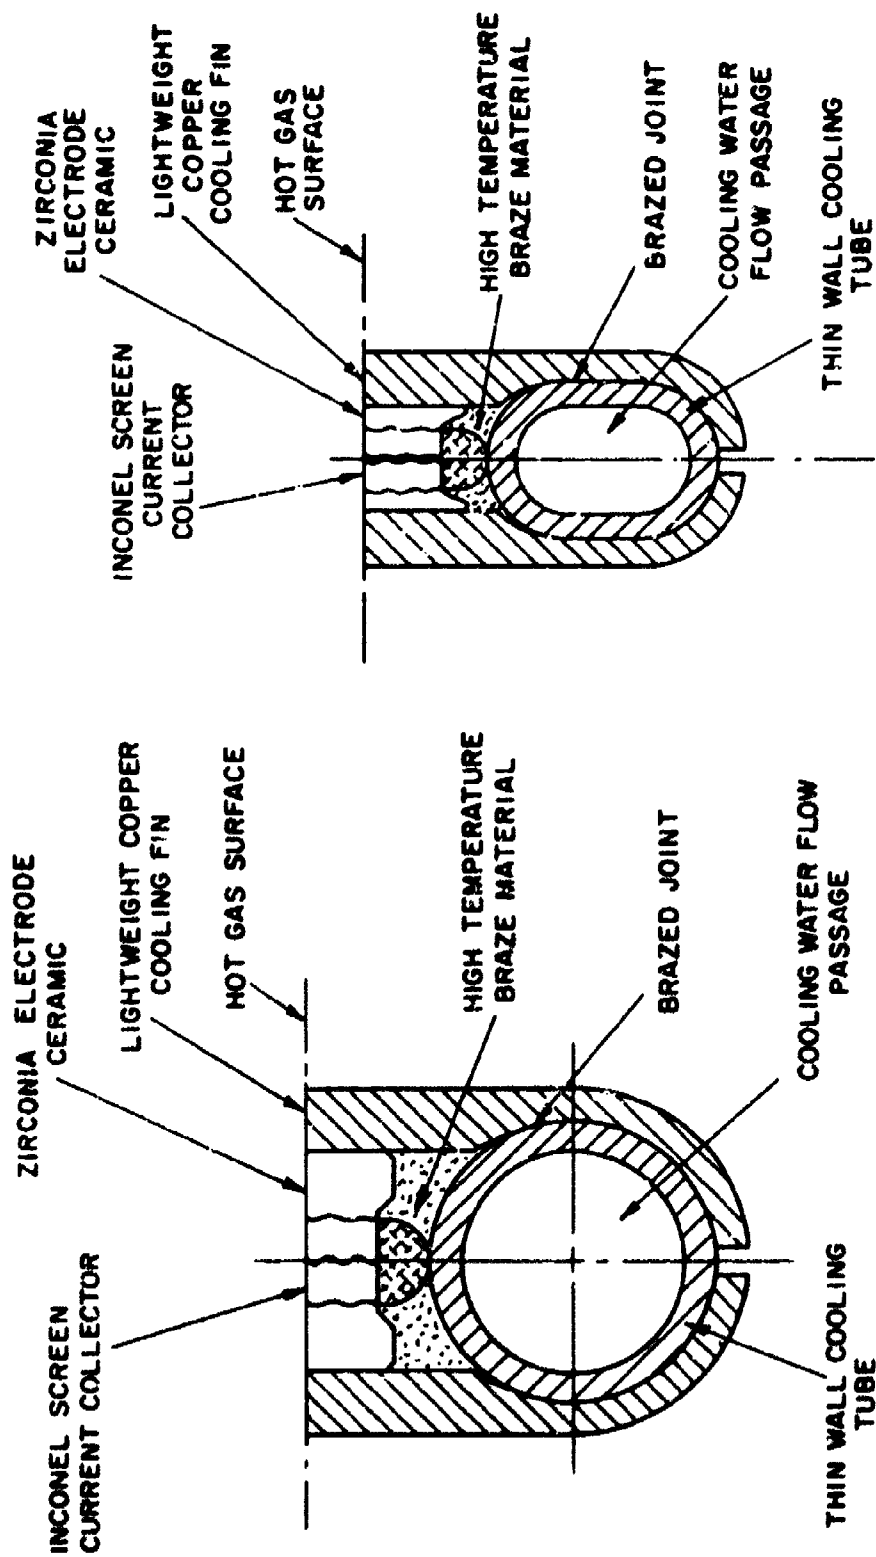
Typical Cross Section of Electrode Wall and Insulator Wall.
